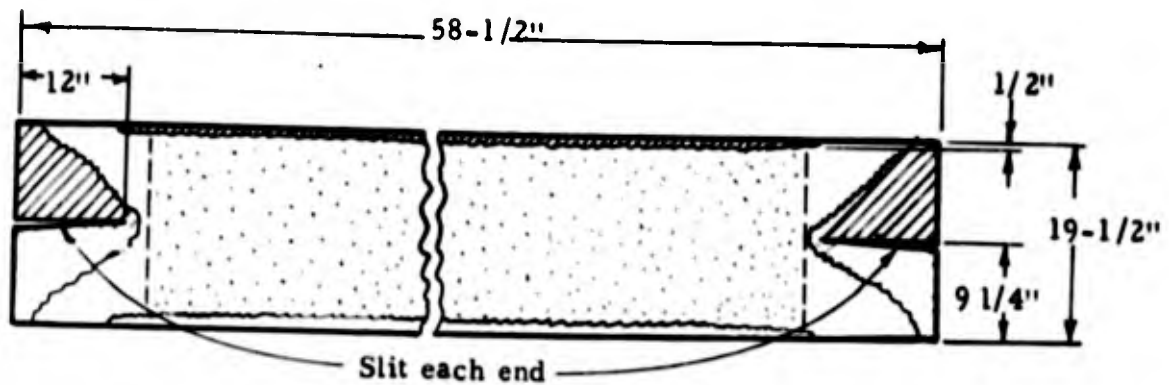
TROUGH MOUNTED AIR BAG SYSTEM ASSEMBLY
